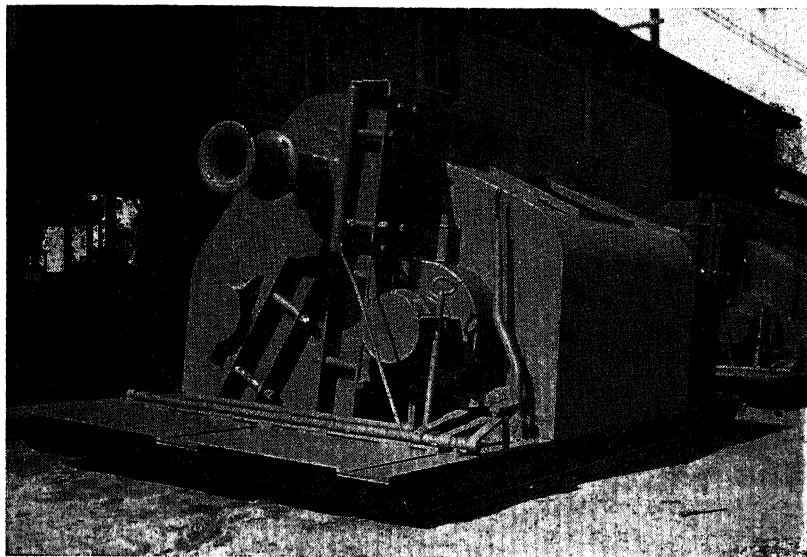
All welded steel unitized draw-works of 8-inch capacity. Welded fabrication is used almost 100%. Even the drum is of this construction. (See Fig. 1276.)
